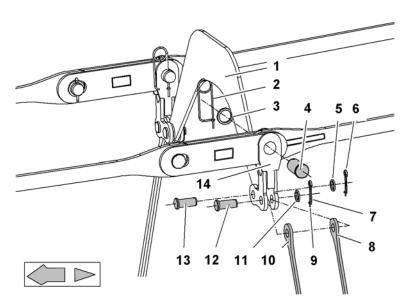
Pin the pendant straps, spacer bracket, connecting elements and midpoint suspension backstay shackles
